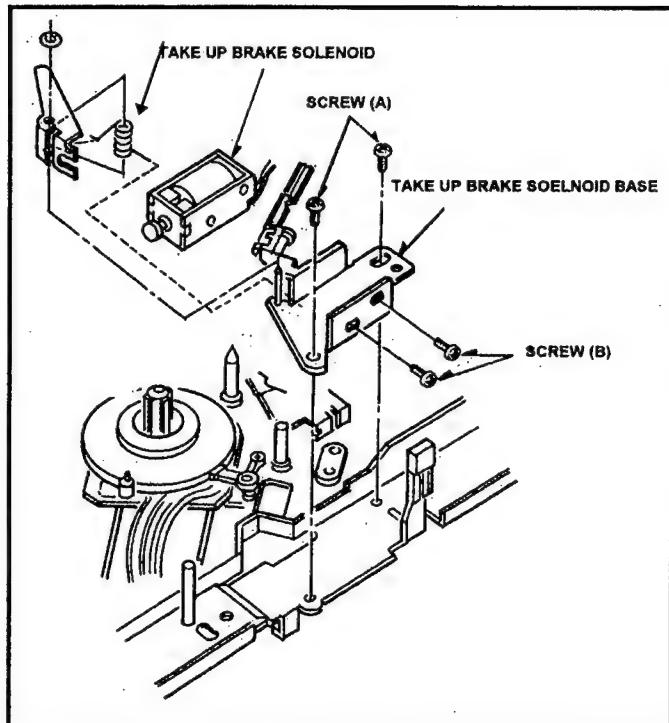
Removal of Take Up Brake Solenoid
